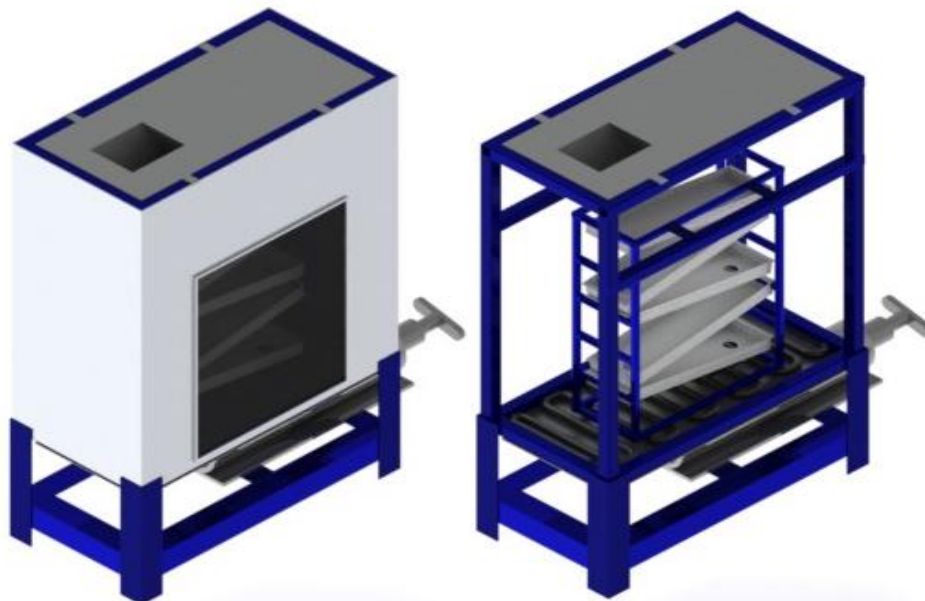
Combined groundnut roaster and oil expeller machine when lagged and un-lagged
